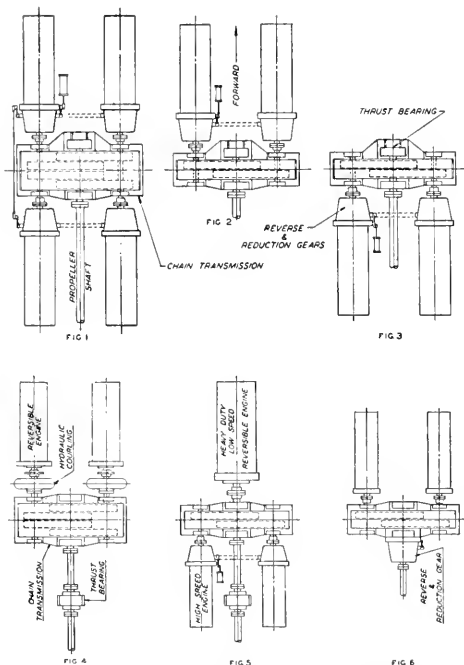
Typical machinery arrangement for multiple-engine marine drives.
